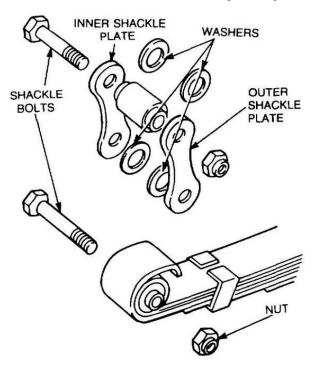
Removal of the Shackle Bolts (Rocker Beam End)
